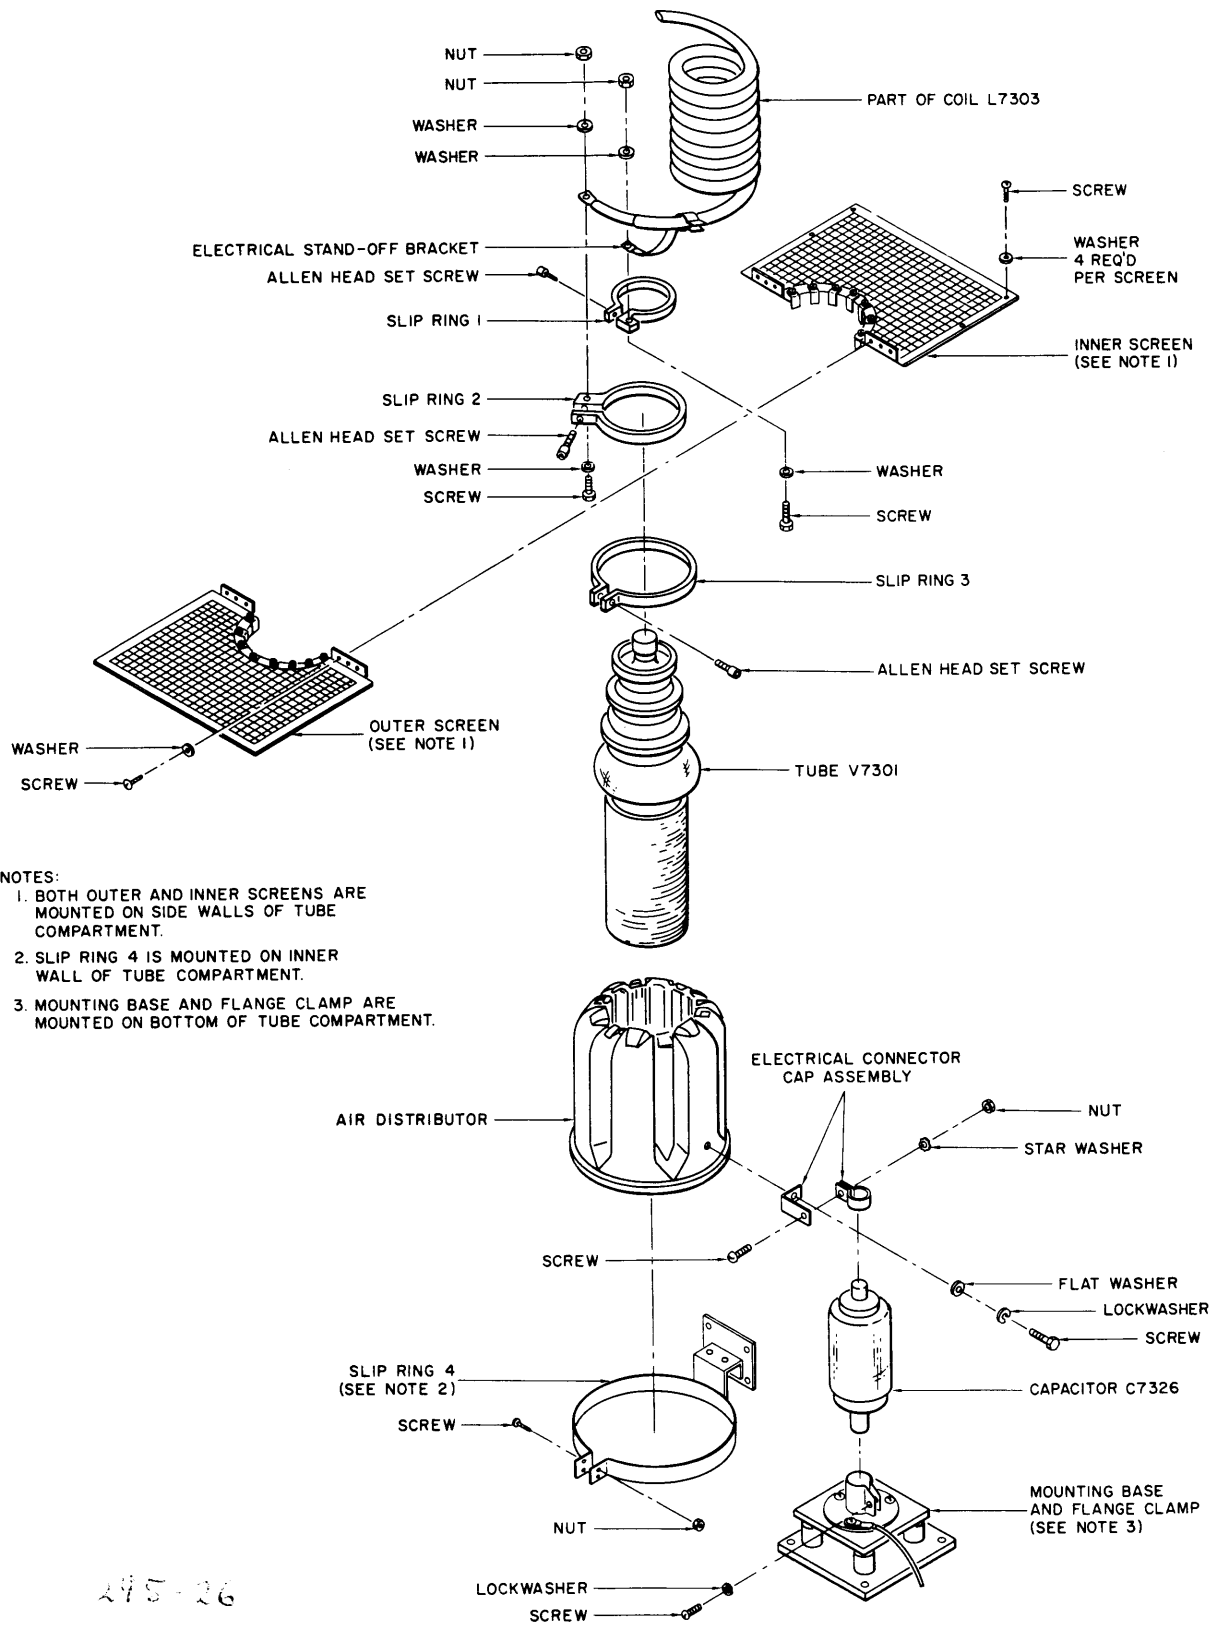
Third Frame Pa Tube Compartment, Installation Diagram.
